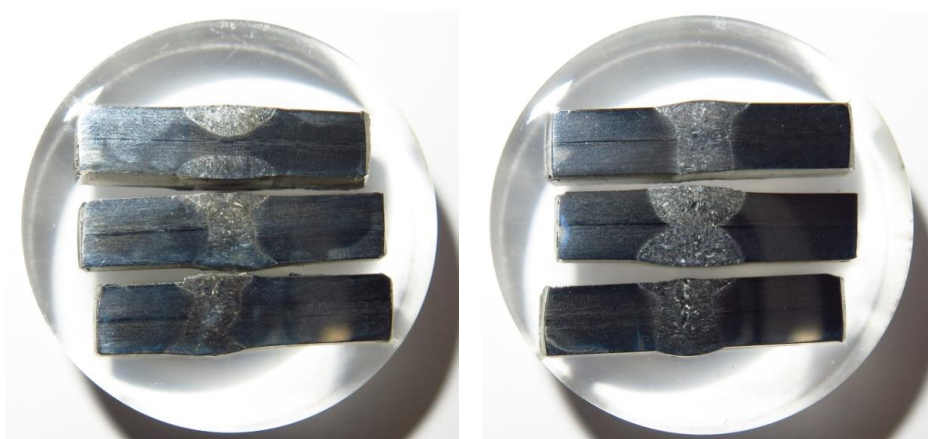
Macro-sections of weld joints welded by current 120 A; a) TIG-3, b) ATIG-B3, c) ATIG-Z3 and macro-sections of weld joints welded by current 140 A; a) ATIG-B4, b) TIG-4, c) ATIG-Z4
